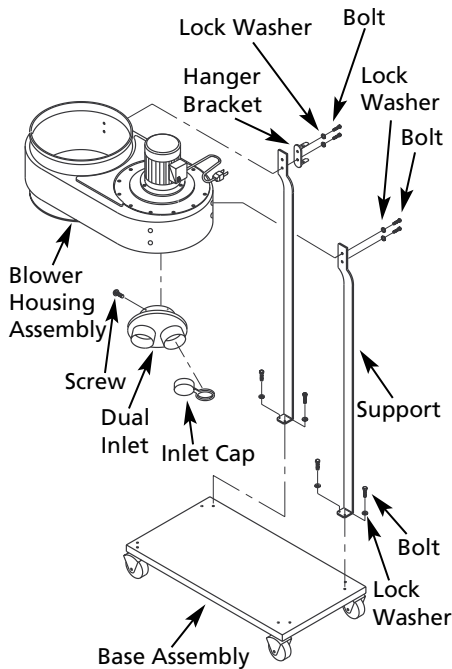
Mounting Supports, Housing Assembly, Dual Inlet and Inlet Cap
